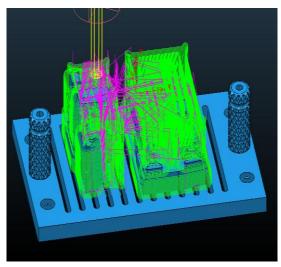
Old bench marked electrodes V/s Cluster plate machining
